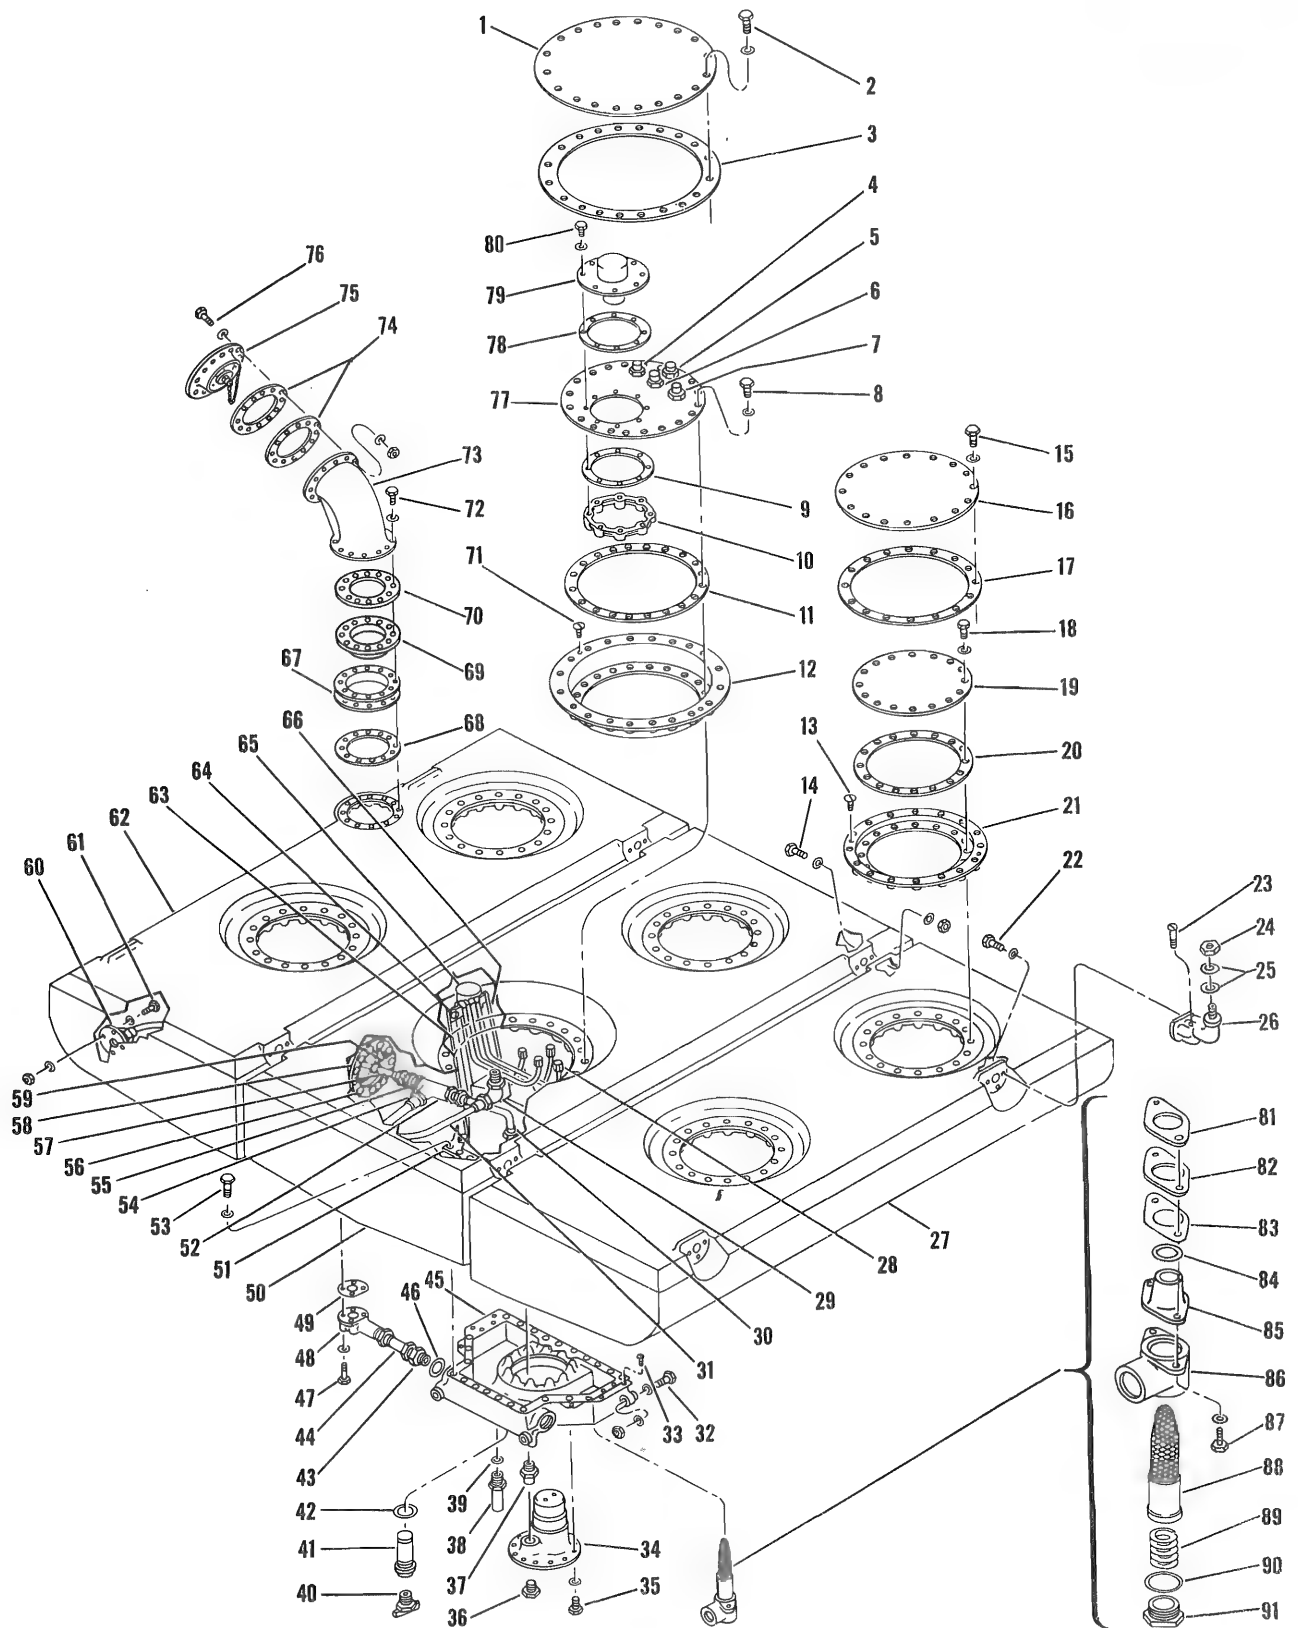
Aft Fuel Tank (Sheet 2 of 2)
